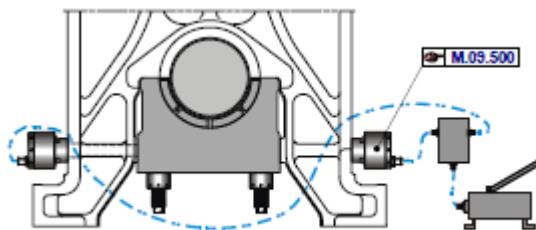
Install the hydraulic tightening tool (유압 체결 공구의 설치)
